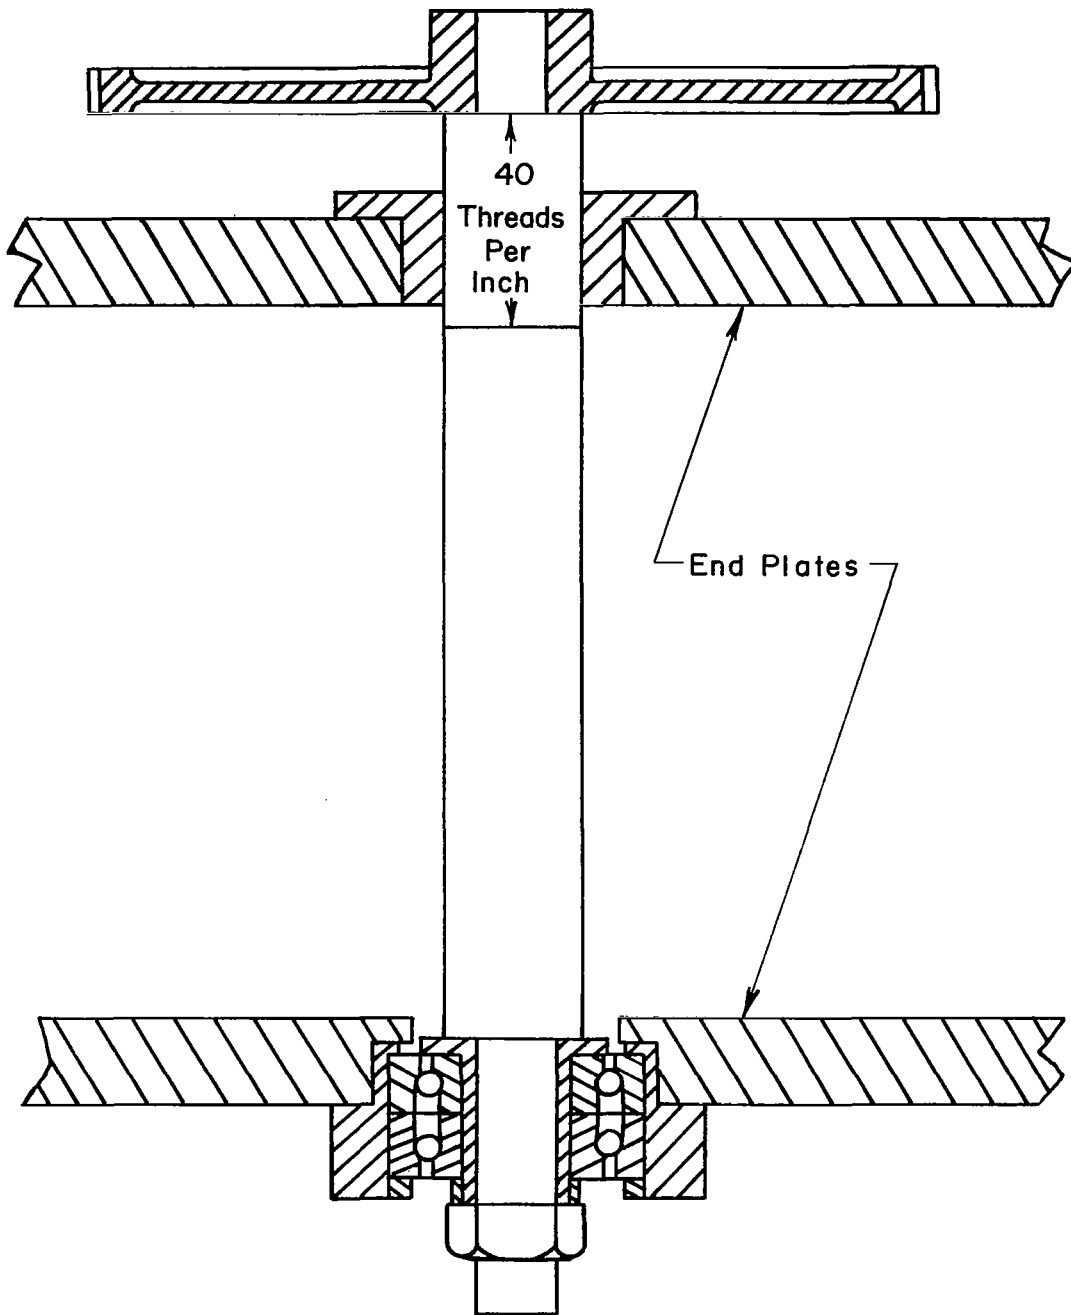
DETAILS OF TESTING MACHINE LOADING SCREW
